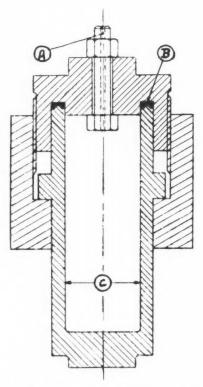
Bomb for tests under pressure. Code to letters is as follows: (A) Hole for pressure measurement, (B) Lead seal, and (C) Enameled inside.
